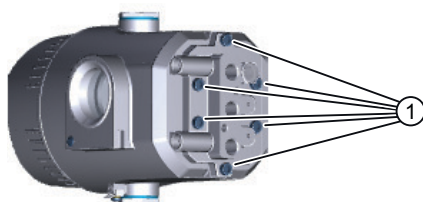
Screws of the pneumatic terminal plate on the positioner 6DR5..6
